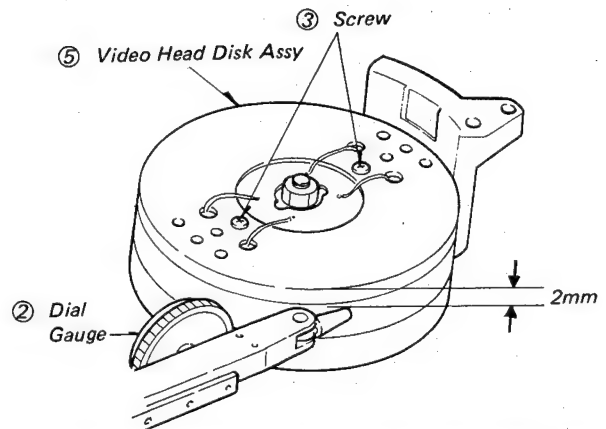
Measurement of the Video Head Disk Assembly Eccentricity
